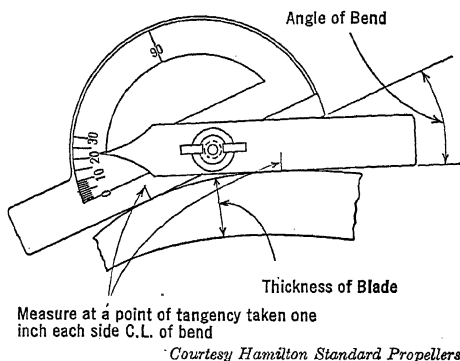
Method of measuring angle of bend in length of two inches of propeller blade.
